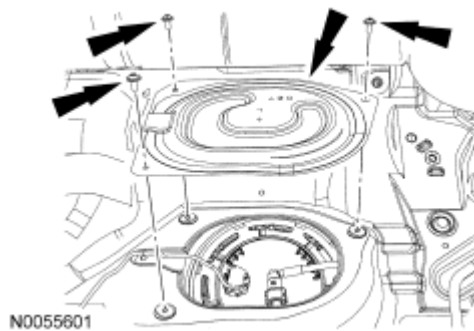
Identifying Fuel Pump Module Access Cover & Screws
